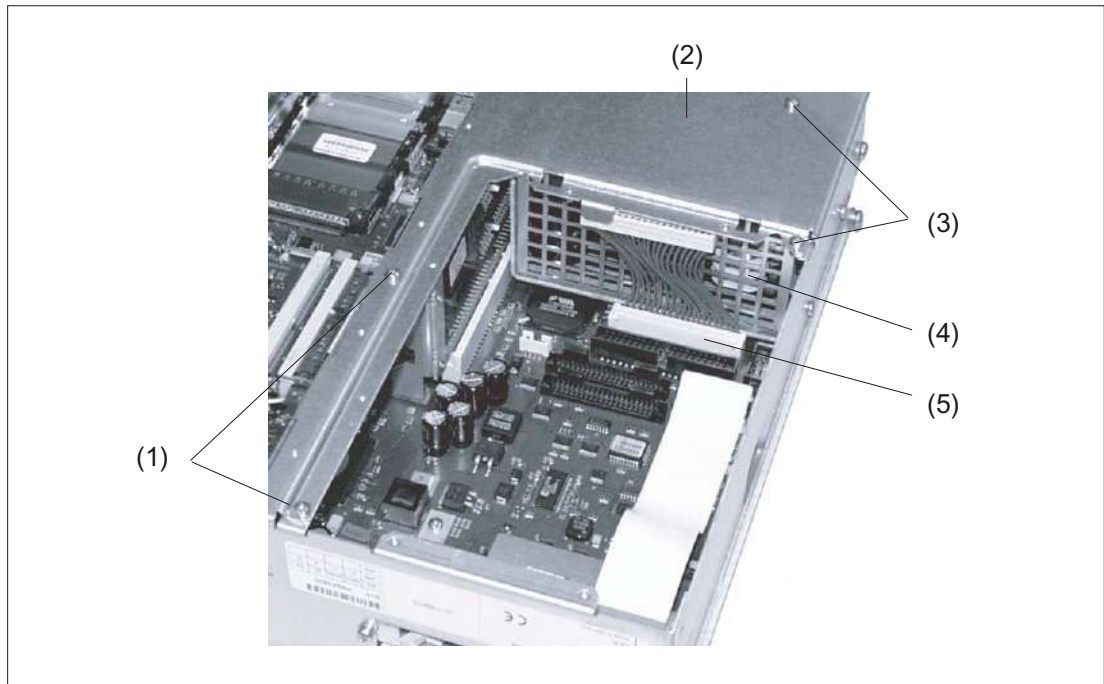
Removal/installation of the power supply (Art. No. A5E 00100846)
